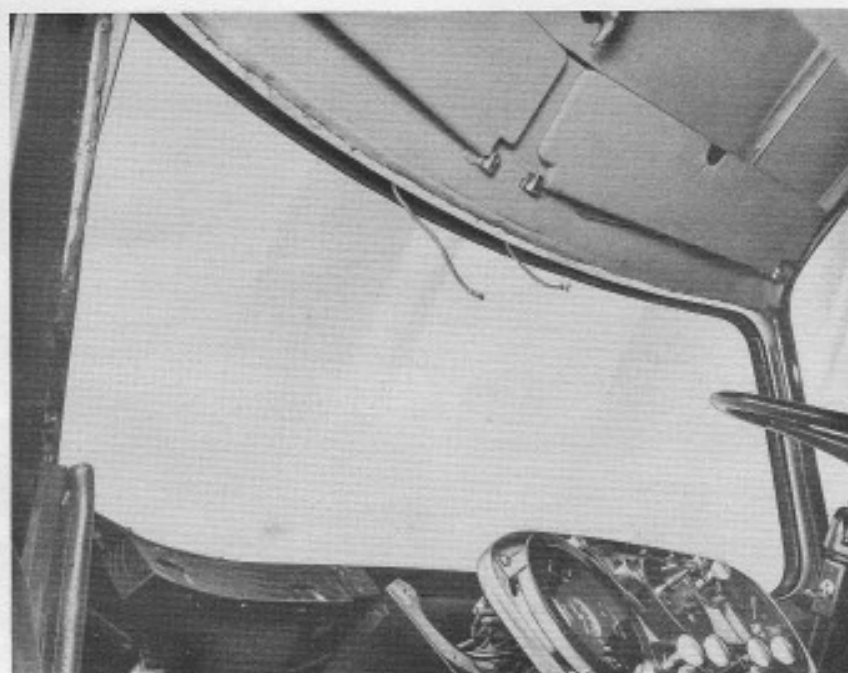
View of windscreen showing cord in position in preparation for drawing seal over angle.
